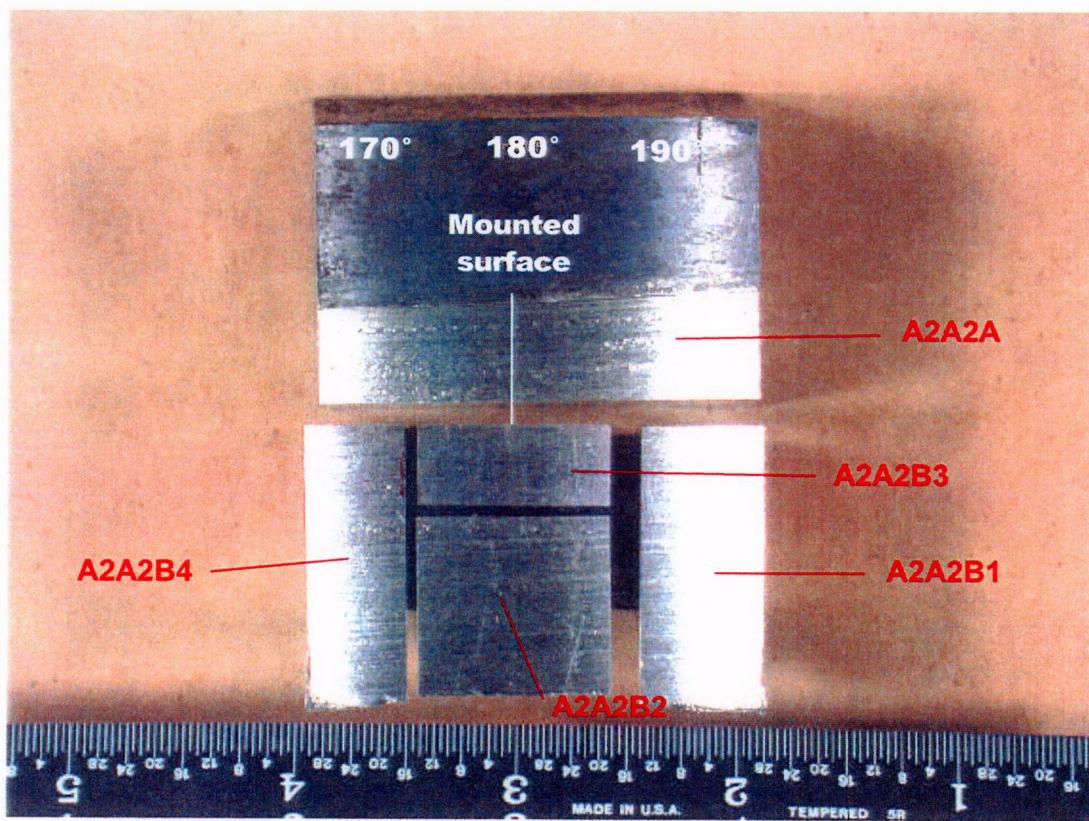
Sectioning of Piece A2A2, looking at the ID of the J-groove weld bore.
